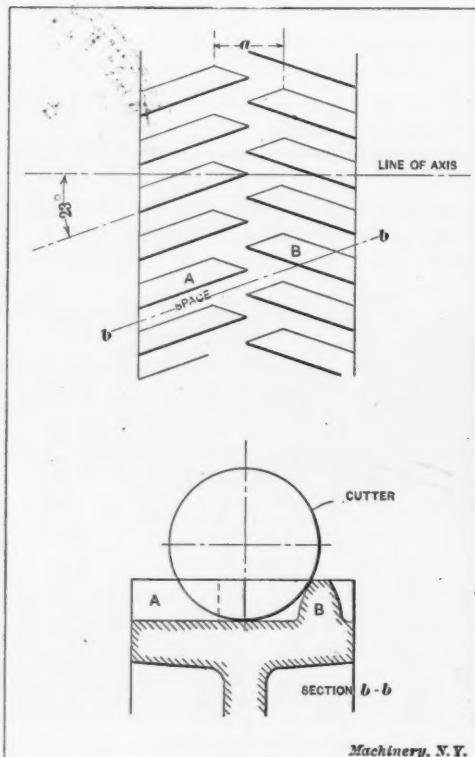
Wüst Herringbone Gear of 23 Degrees
